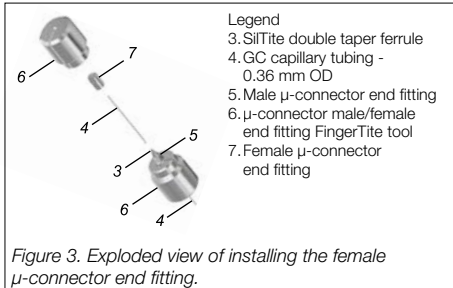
Exploded view of installing the female  $\mu$ -connector end fitting.
